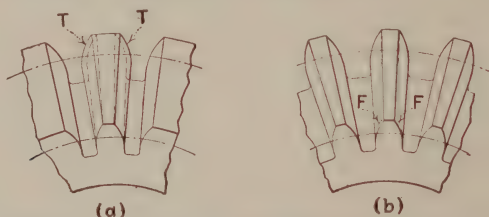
(a) Shows at *T* when the tooth is trimmed with the cutter; (b) shows at *F* when the tooth is filed.
